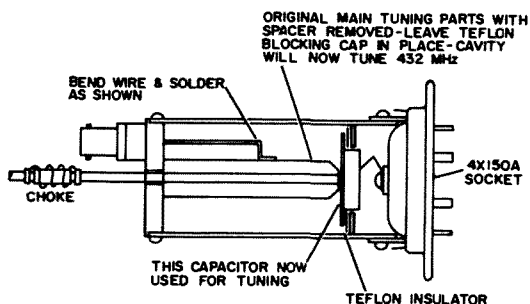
Grid cavity modifications. The original main tuning parts are removed.
